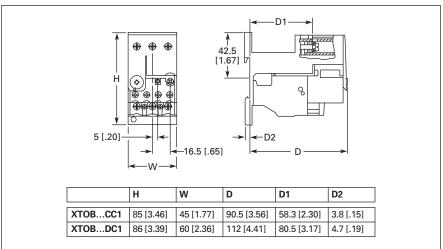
Frame B – C, XTOBXDINC DIN Rail or Panel Mount Adapter and Frame D, XTOBXDIND DIN Rail or Panel Mount Adapter — Approximate Dimensions in mm [in]
